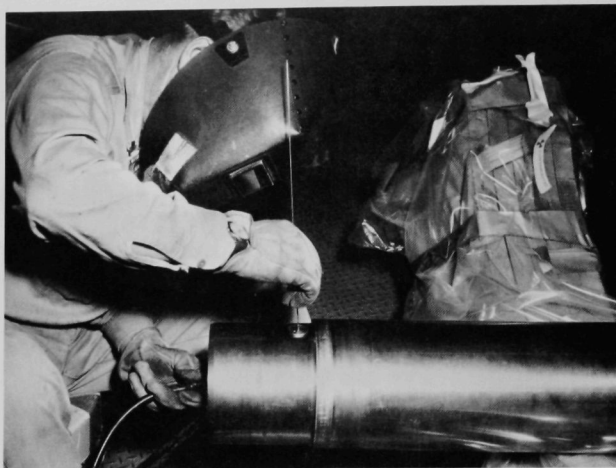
Plugging of Keyway Relief Holes on Pump Shaft. ANL Neg. No. 103-O5523.
